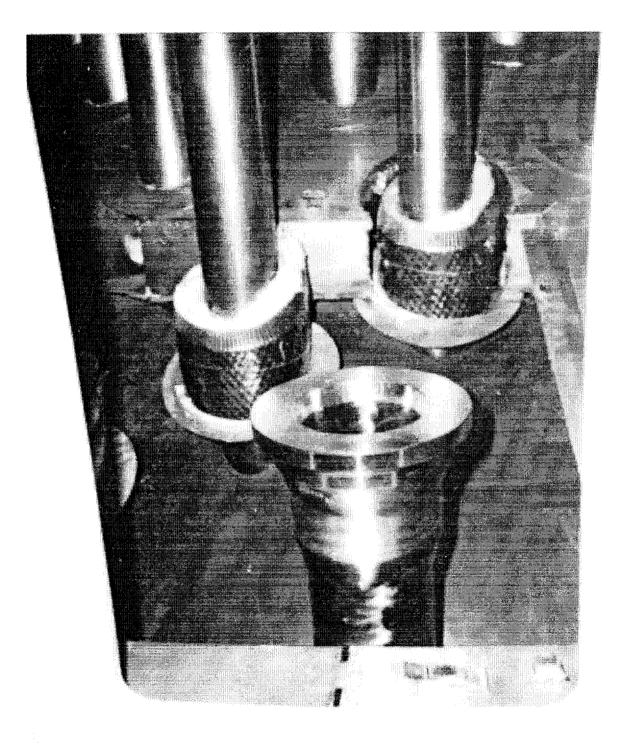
St. Lucie Unit 2 RPV Head Insulation Initial Installation Showing Plug Rings with Lower End Cap
